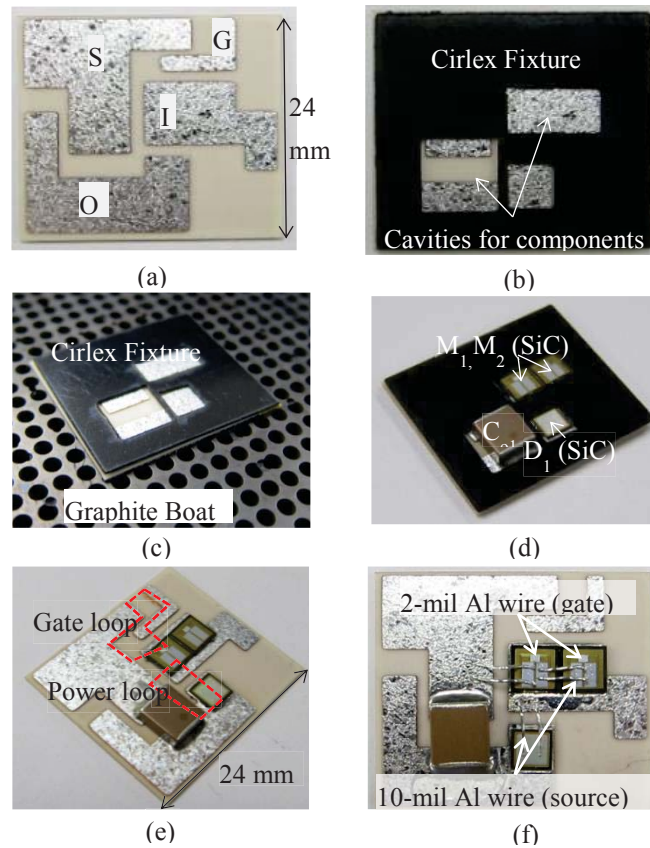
Fabrication process of the DBC module: (a) chemical etching, (b) fixture design, (c) masking, (d) assembly, (e) vacuum reflow, and (f) wire-bonding.
